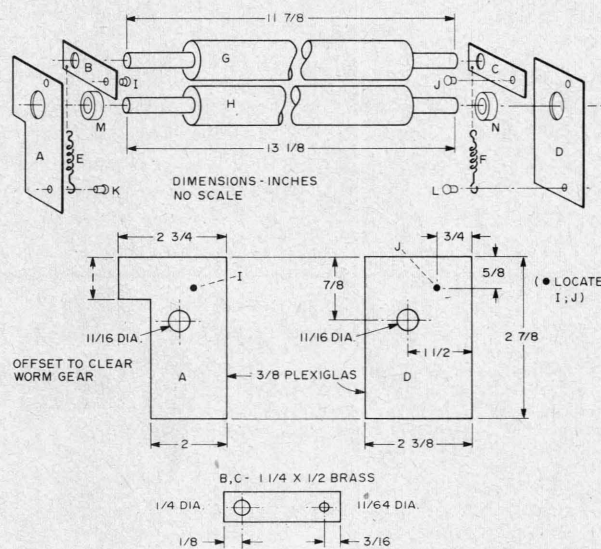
Paper feed assembly (not to scale). A, D: left and right supports, 3/8" plexiglas. B, C: top roller bearing, adjustable brass, 1/8" x 1/2" x 1-1/4". E, F: tension springs. G, H: rollers. I, J: #8 screws, 1/4". K, L: 4/40 1/2". M, N: ball bearings.
